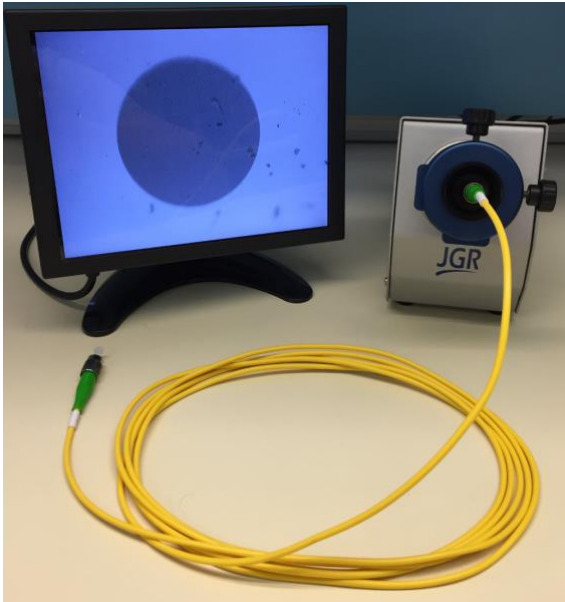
Dirty connector end-face inspection using Santec's EFI-100
